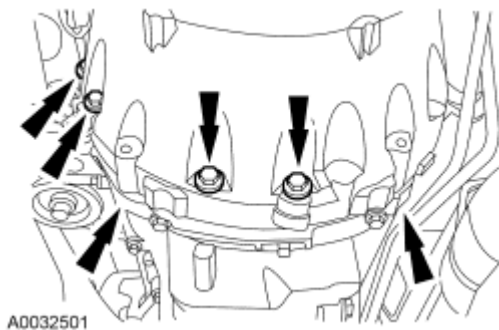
Locating Transmission Fluid Indicator & Tube Assembly
